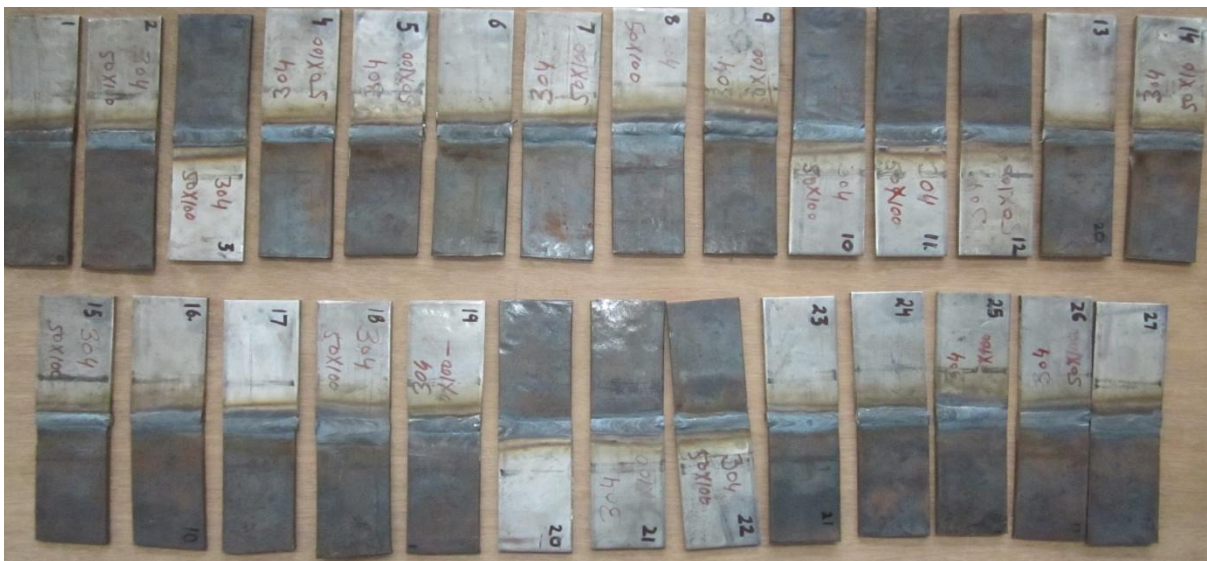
Specimens of AISI 304 welded with AISI 4340 grade stainless steel immediately after welding
